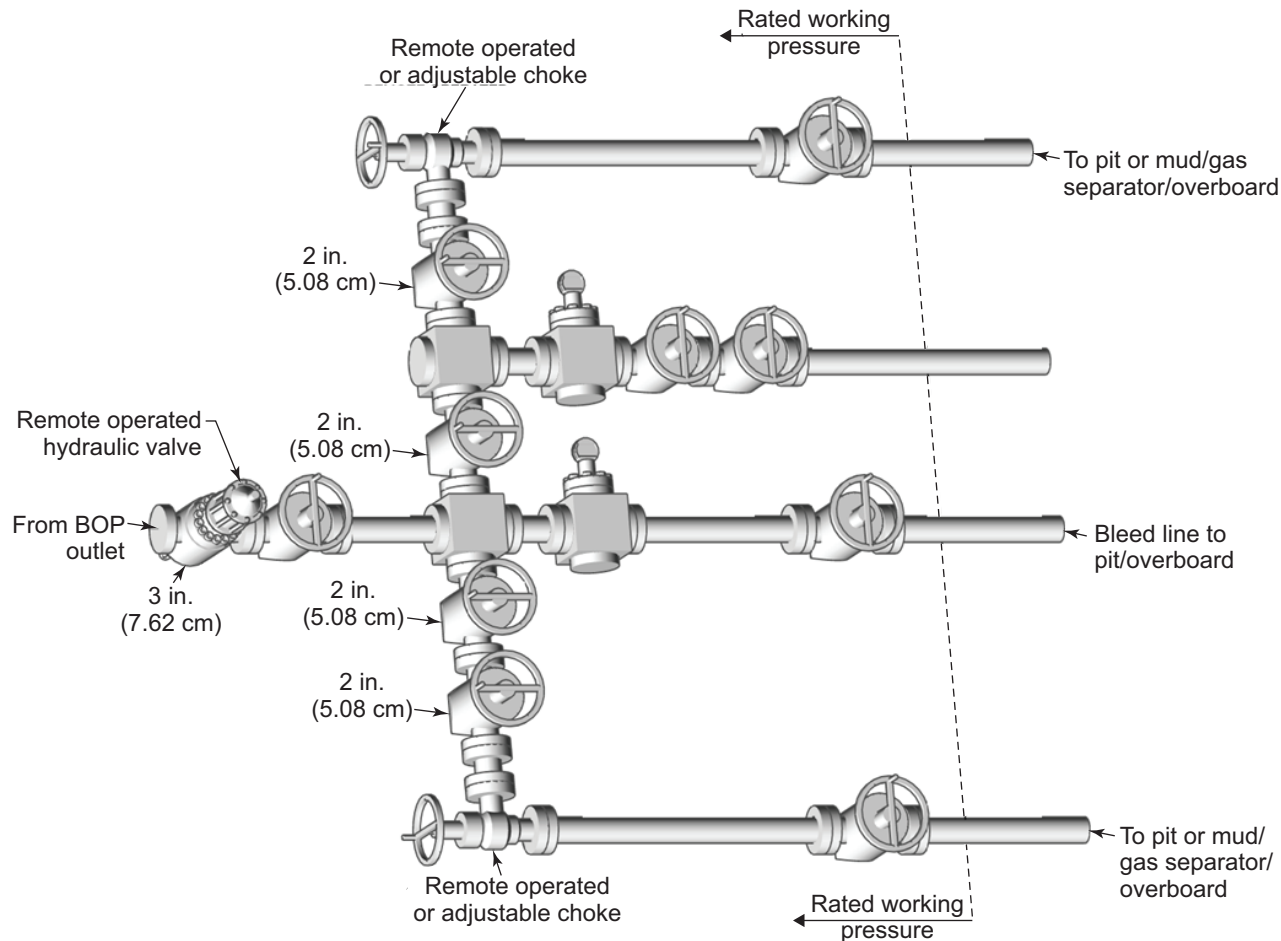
Example Choke Manifold Assembly for 10K or Greater Rated Working Pressure Service—Surface BOP Installations
